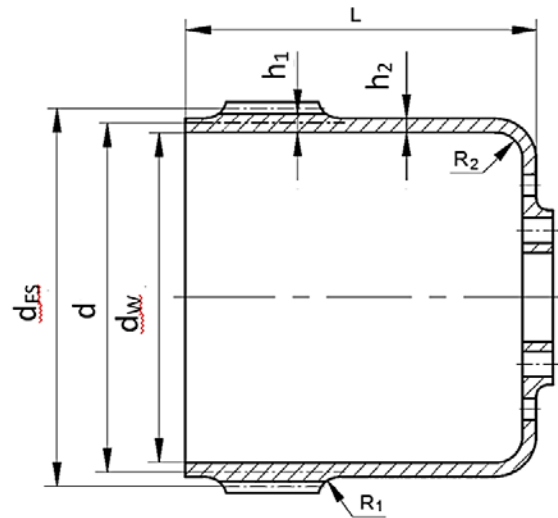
The flexspline geometric model: d_{FSW} – spacing diameter, d - diameter of the neutral layer circle, d_w - inside diameter, h_1 - body thickness without toothed ring, h_2 - sleeve body thickness, L - flexspline length.
